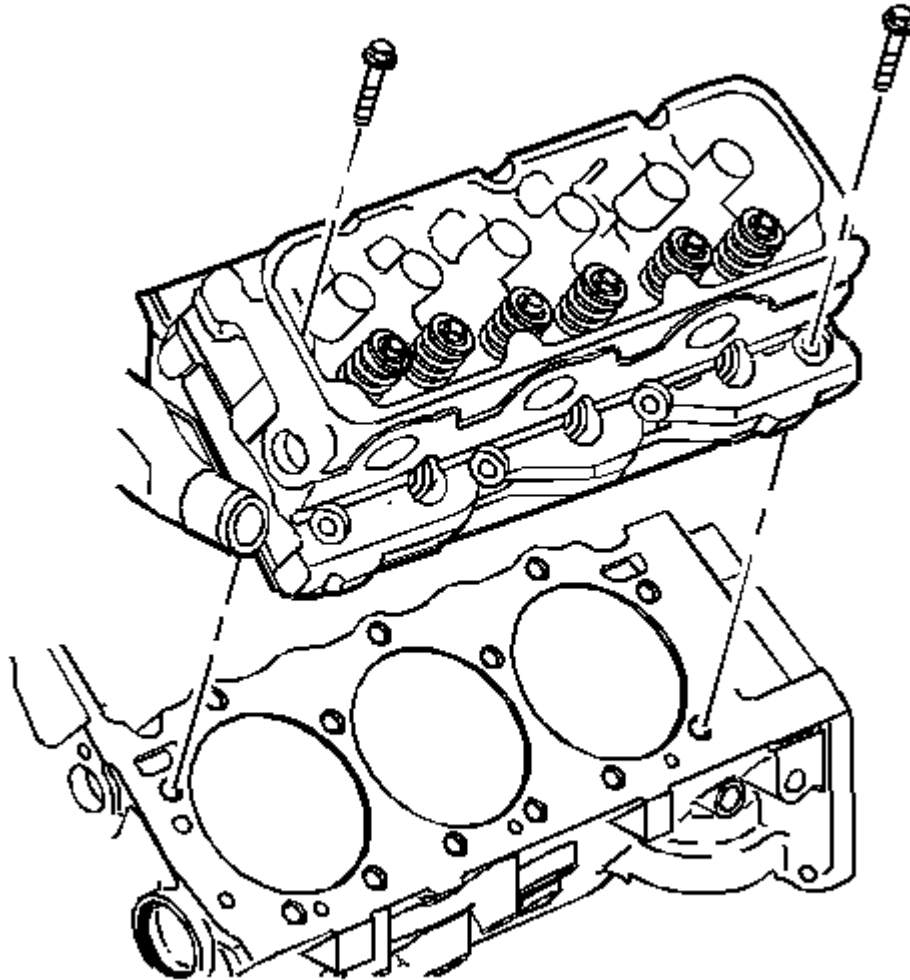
Identifying Cylinder Head & Cylinder Head Bolts
